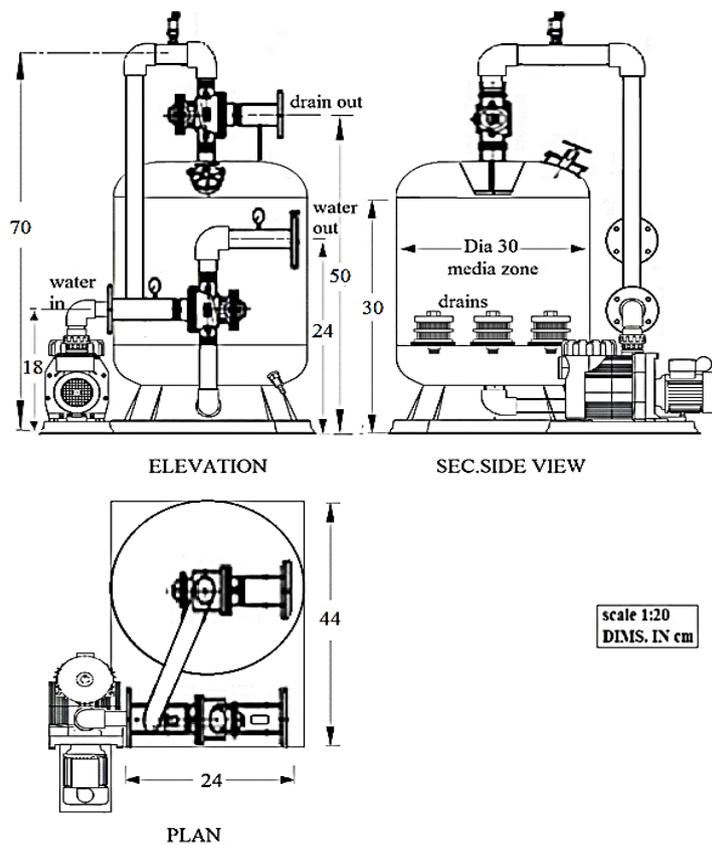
Elevation, plan and sectional side view of the used traditional sand filter with its components and dimensions.
